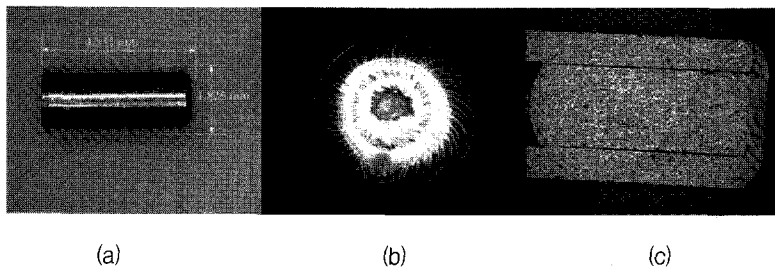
Photographs of welded aluminium inner capsule; (a) overview of welded capsule, (b) weld bead shape, (c) cross-section of capsule
